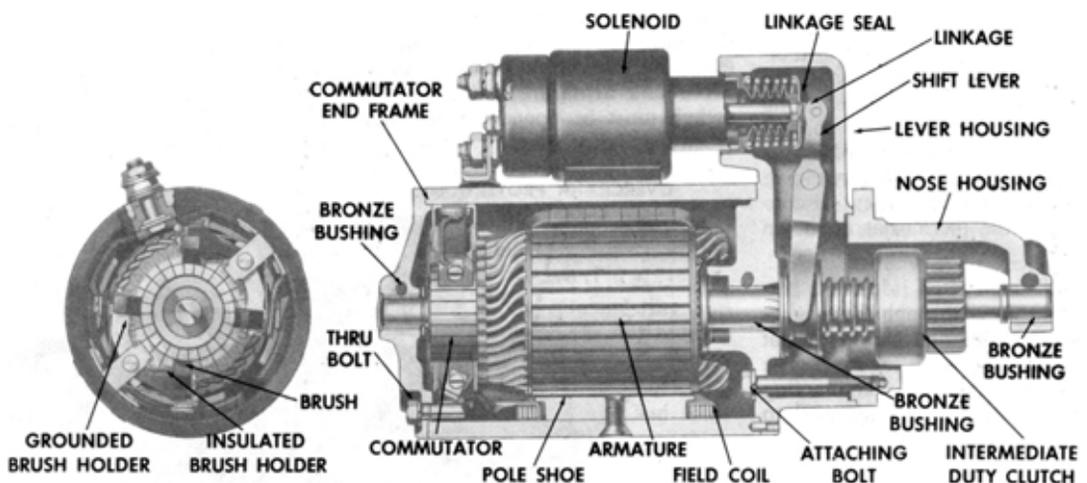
Cross-sectional view of motor with intermediate duty clutch. Note different attaching bolt construction than Figure 4.
